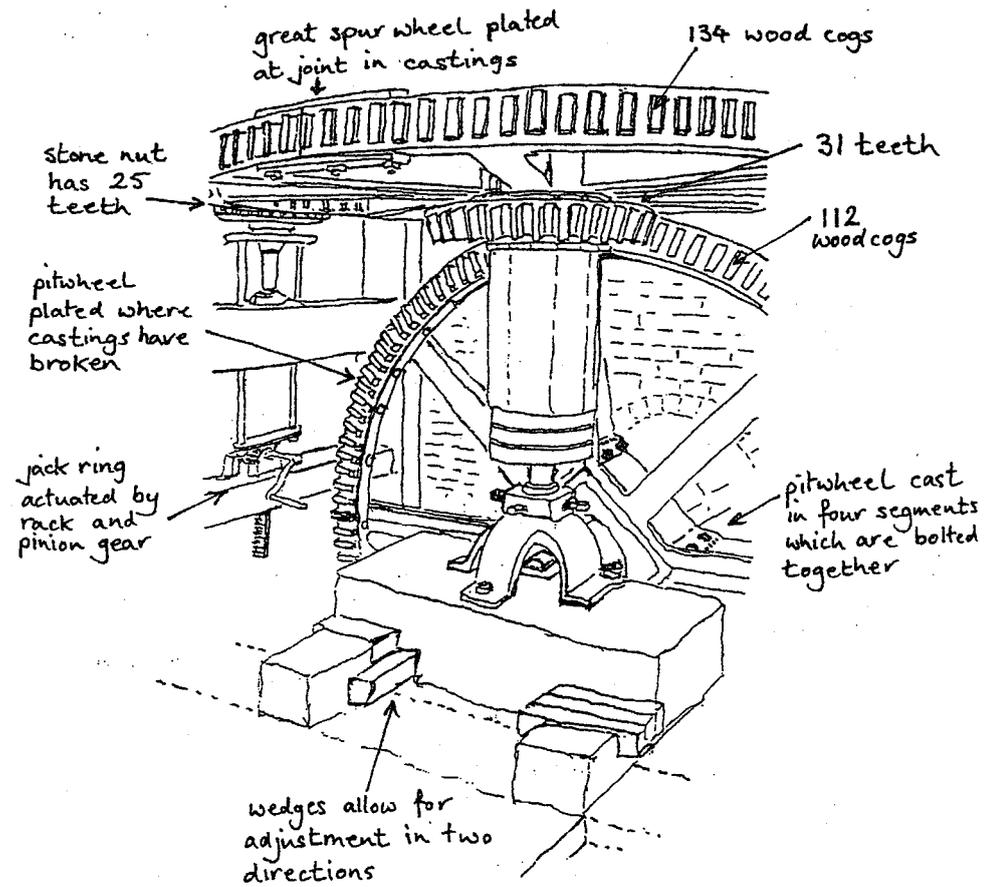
The main drive machinery to the millstones with the tentering gear at the left
